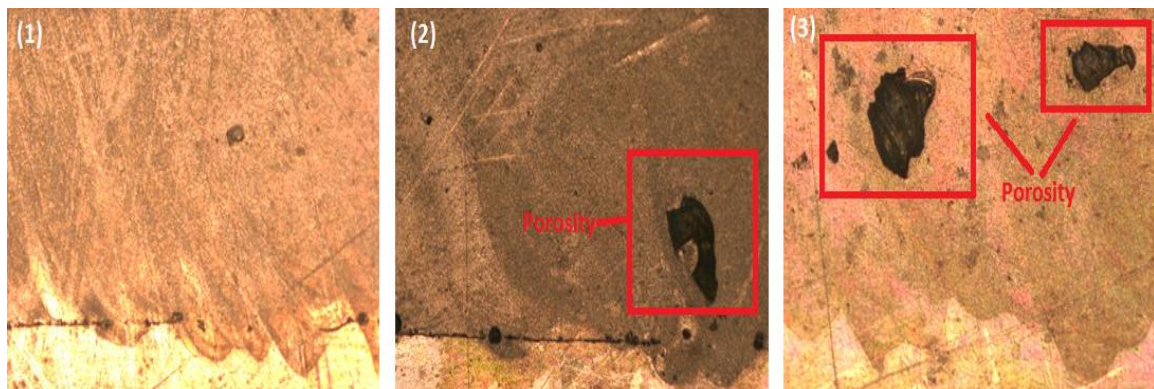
Longitudinal cross section view of weld on magnesium.
